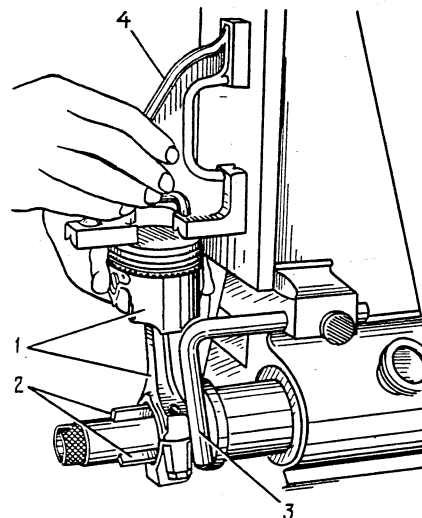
Checking the Axes of Piston Pin and Connecting Rod Big End for Parallelism:
